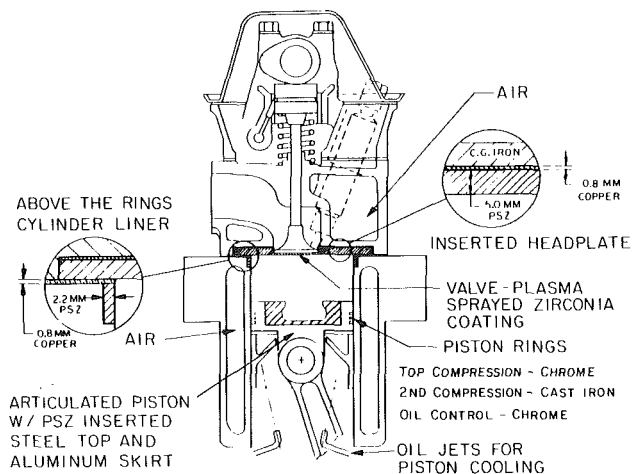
Design of insulated single-cylinder engine with a PSZ piston bowl insert
